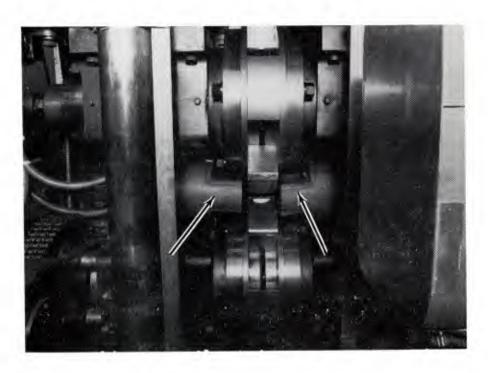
Die Set Installed in Roll Forging Machine (#76-6618)
